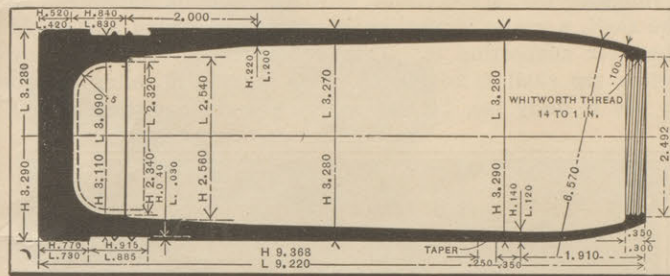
18-pound Shrapnel Shell showing Dimensions and Manufacturing Limits
